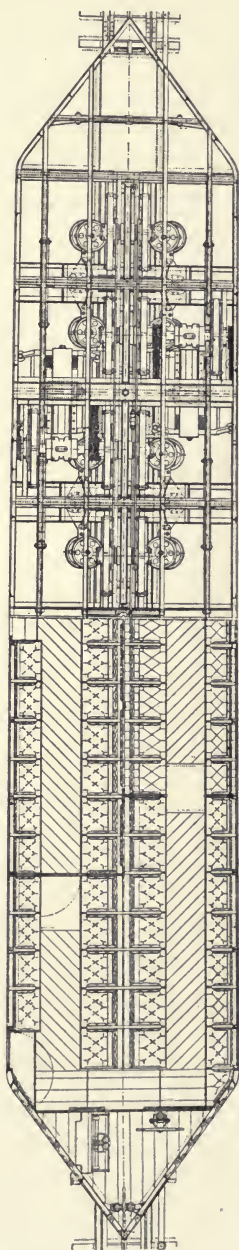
PLAN OF A BEHR MONO-RAILWAY CAR
